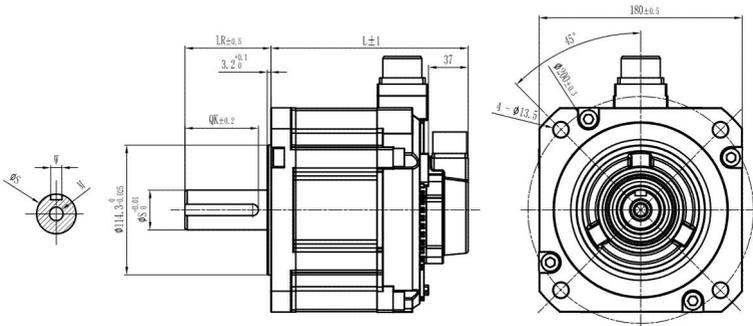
Outline and dimensions of frame No. 180 medium-inertia servo motor
